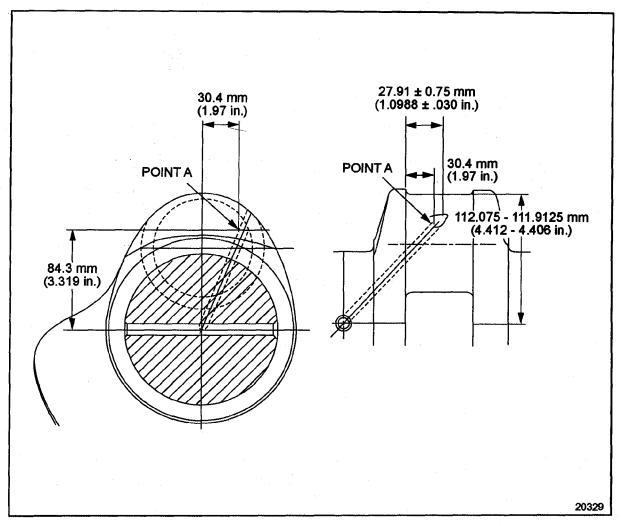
Oil Hole Specifications - Connecting Rod Journals - 11.1 L Crankshaft (139 mm stroke)
